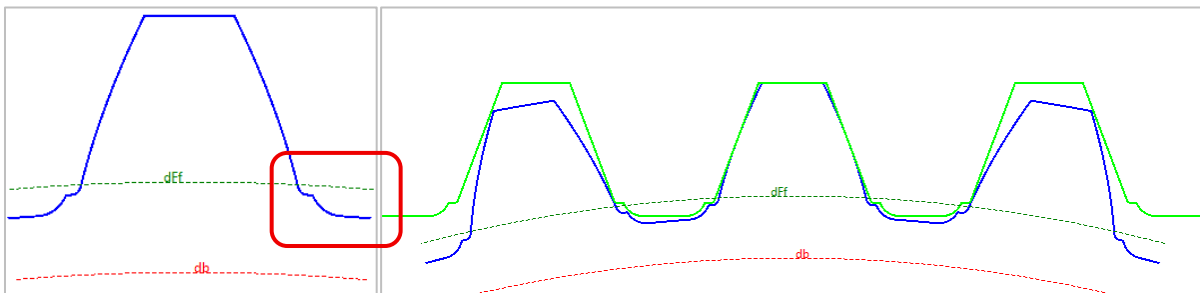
Left: Tooth form with unfavorable definition of rough machining and finish machining, resulting grinding notch. Right: Hypothetical tool in green.
